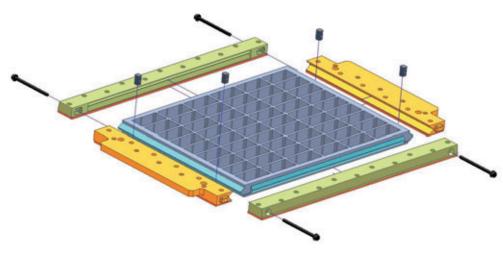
The Dynamic Mould Insert™ is clamped in a four-part, screwed frame with rubber bearings
